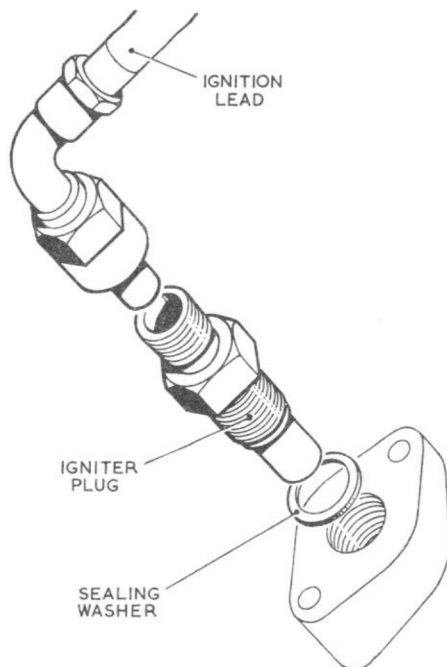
Removing the igniter plug (Post-Mod. M101)
